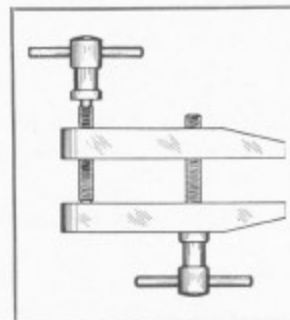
Machinist's Clamp. A problem including thread specifications, drill and tap sizes, etc. Price: 1 Blue Print, 2 Job Sheets, 35c.
